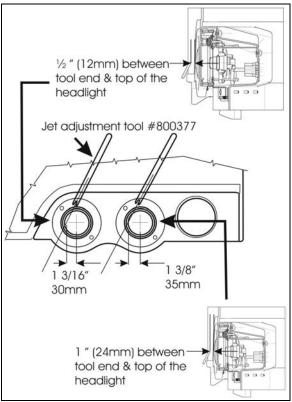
WASHER NOZZLES ADJUSTMENT
